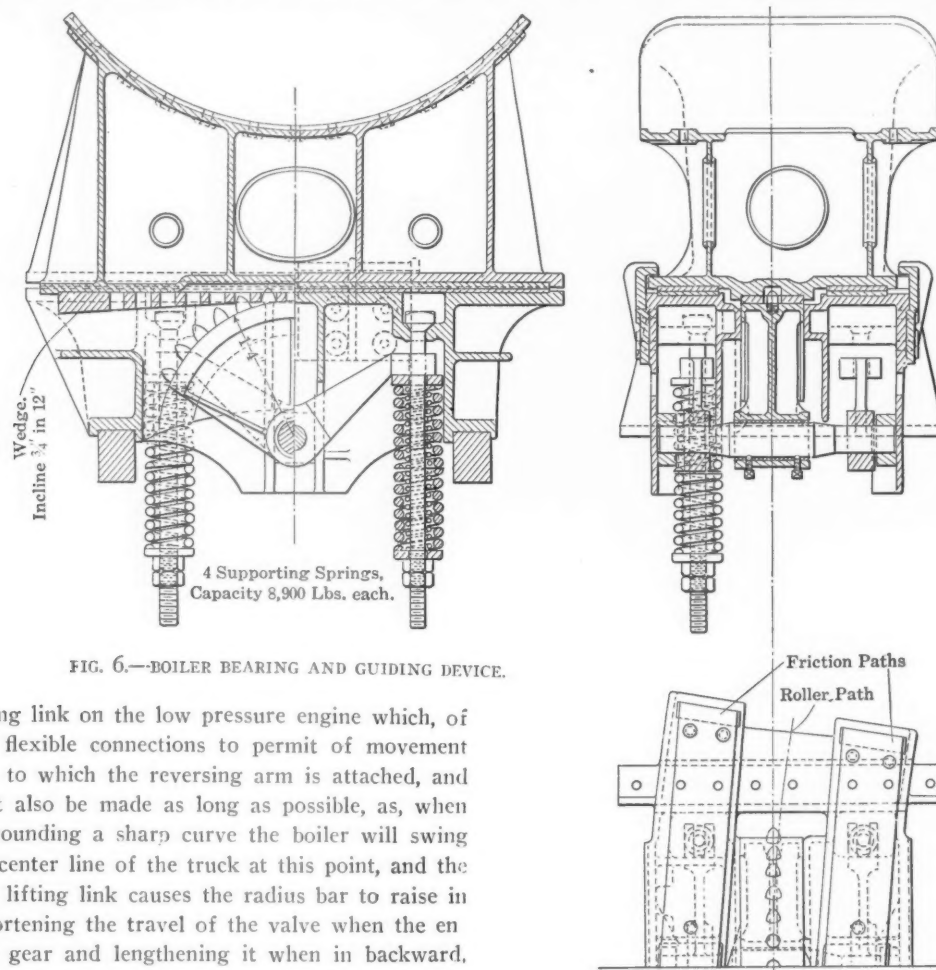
BOILER BEARING AND GUIDING DEVICE.
